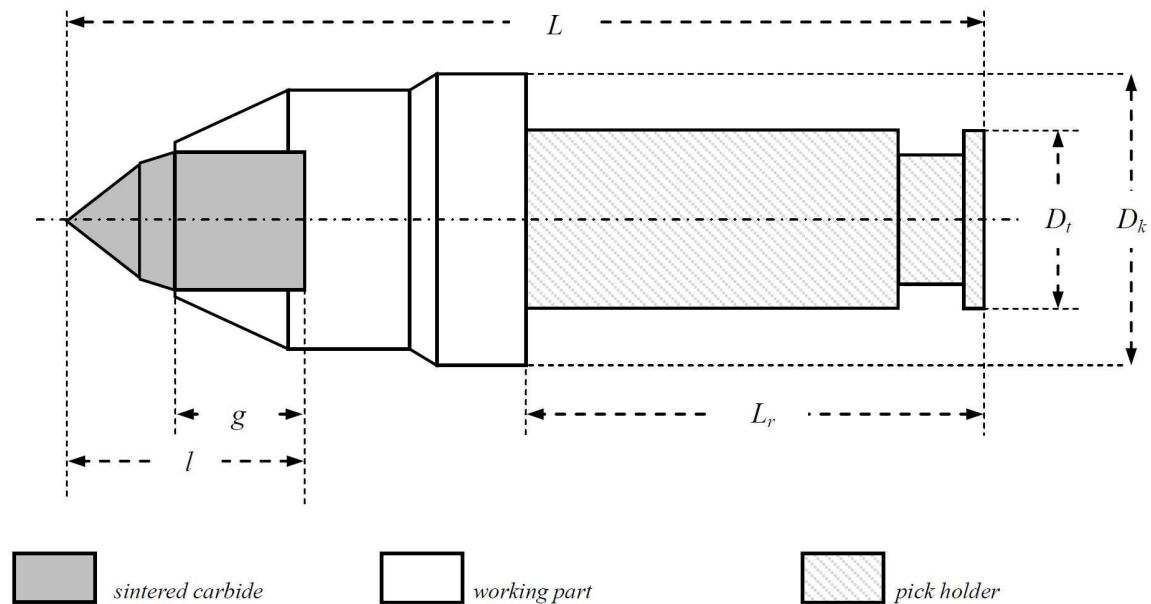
The geometrical parameters of the cutting tool in the roadheader's cutterheads
